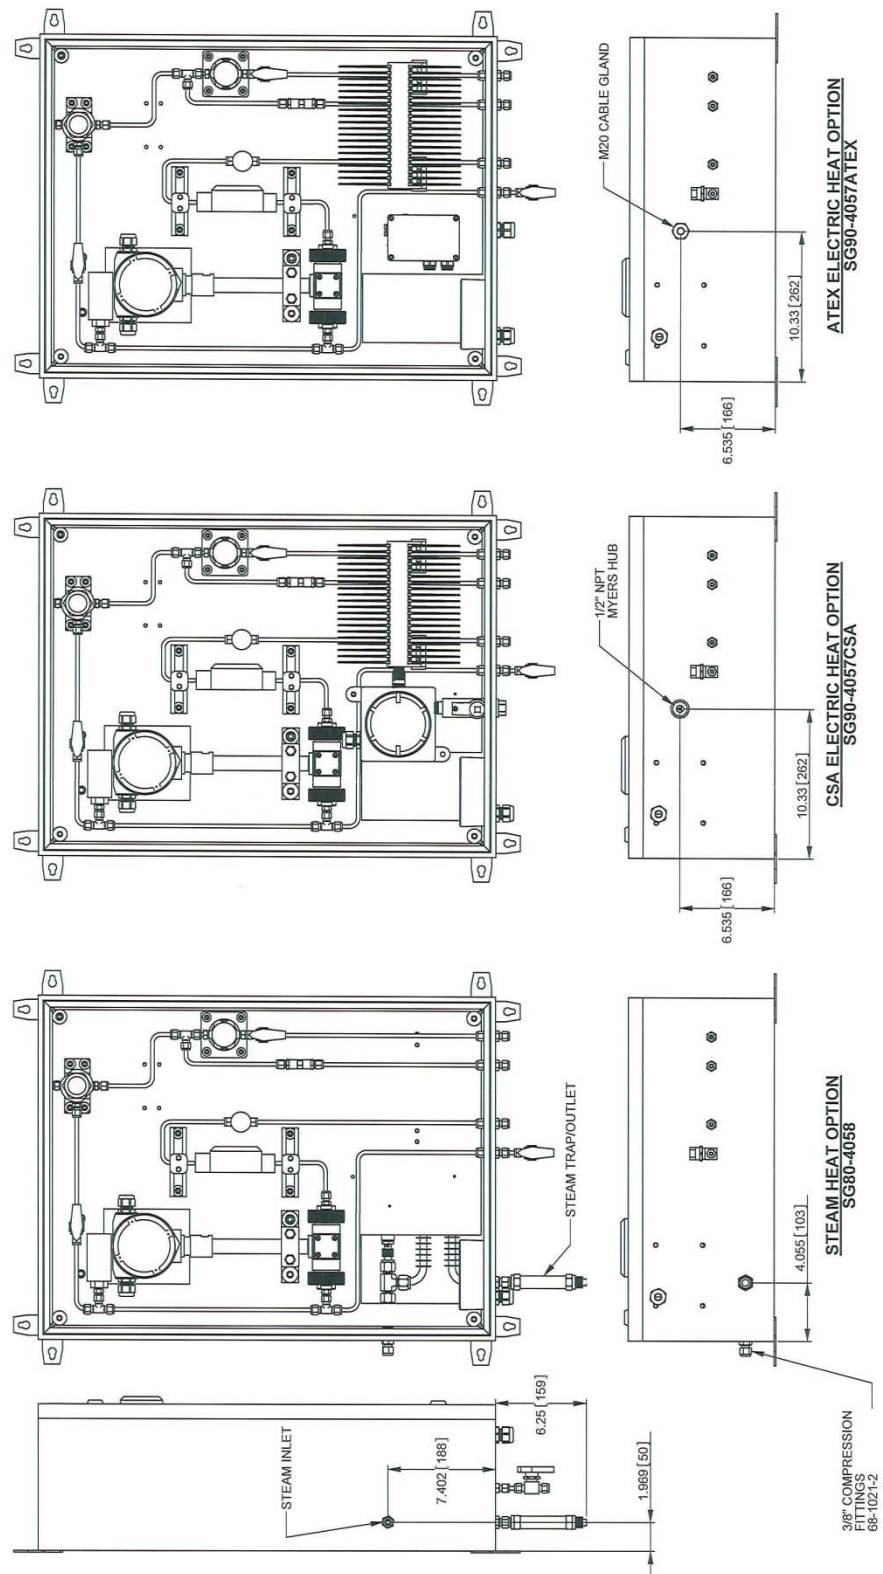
SG91-6001: General assembly drawing, dry gas system (sheet 2 of 3)
